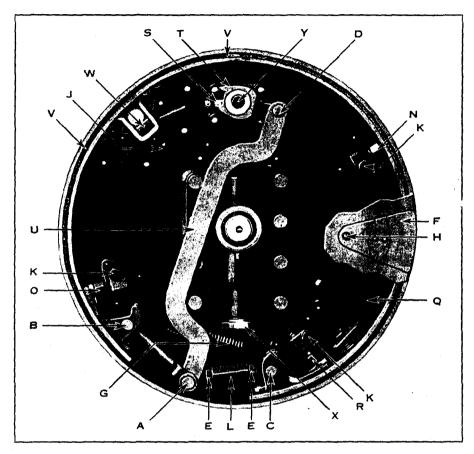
V-63 Front Wheel Brakes (L. H.)
